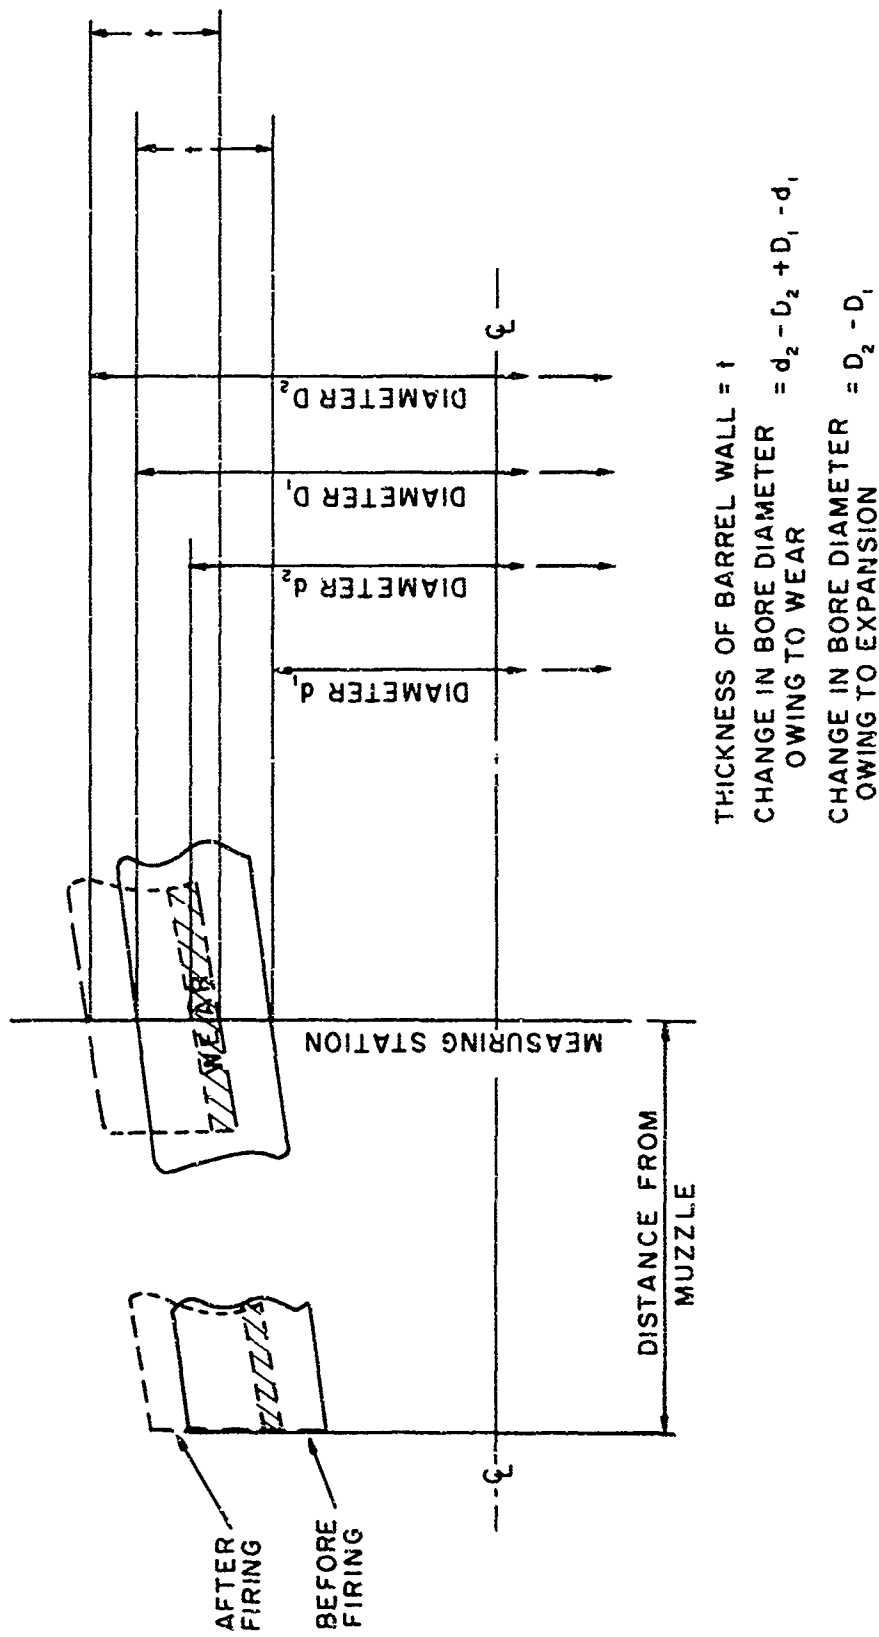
SKETCH SHOWING DIMENSIONS USED IN CALCULATING CHANGE IN BORE Owing TO WEAR AND EXPANSION
